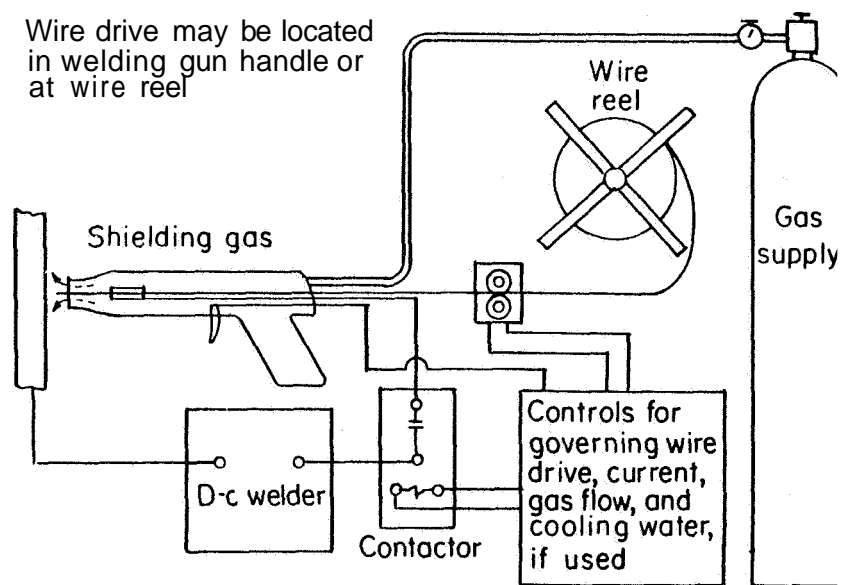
SKETCH OF A GAS METAL-ARC WELDING SYSTEM (Ref. 29)
